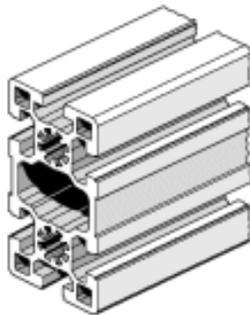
Bosch-Rexroth™ Aluminum Extrusion Framing
